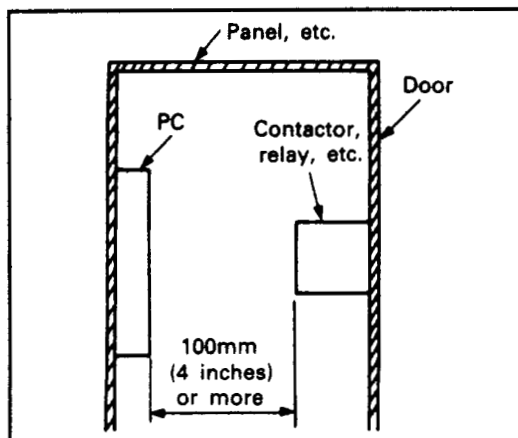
Minimum Front Clearance with Panel Door Closed
